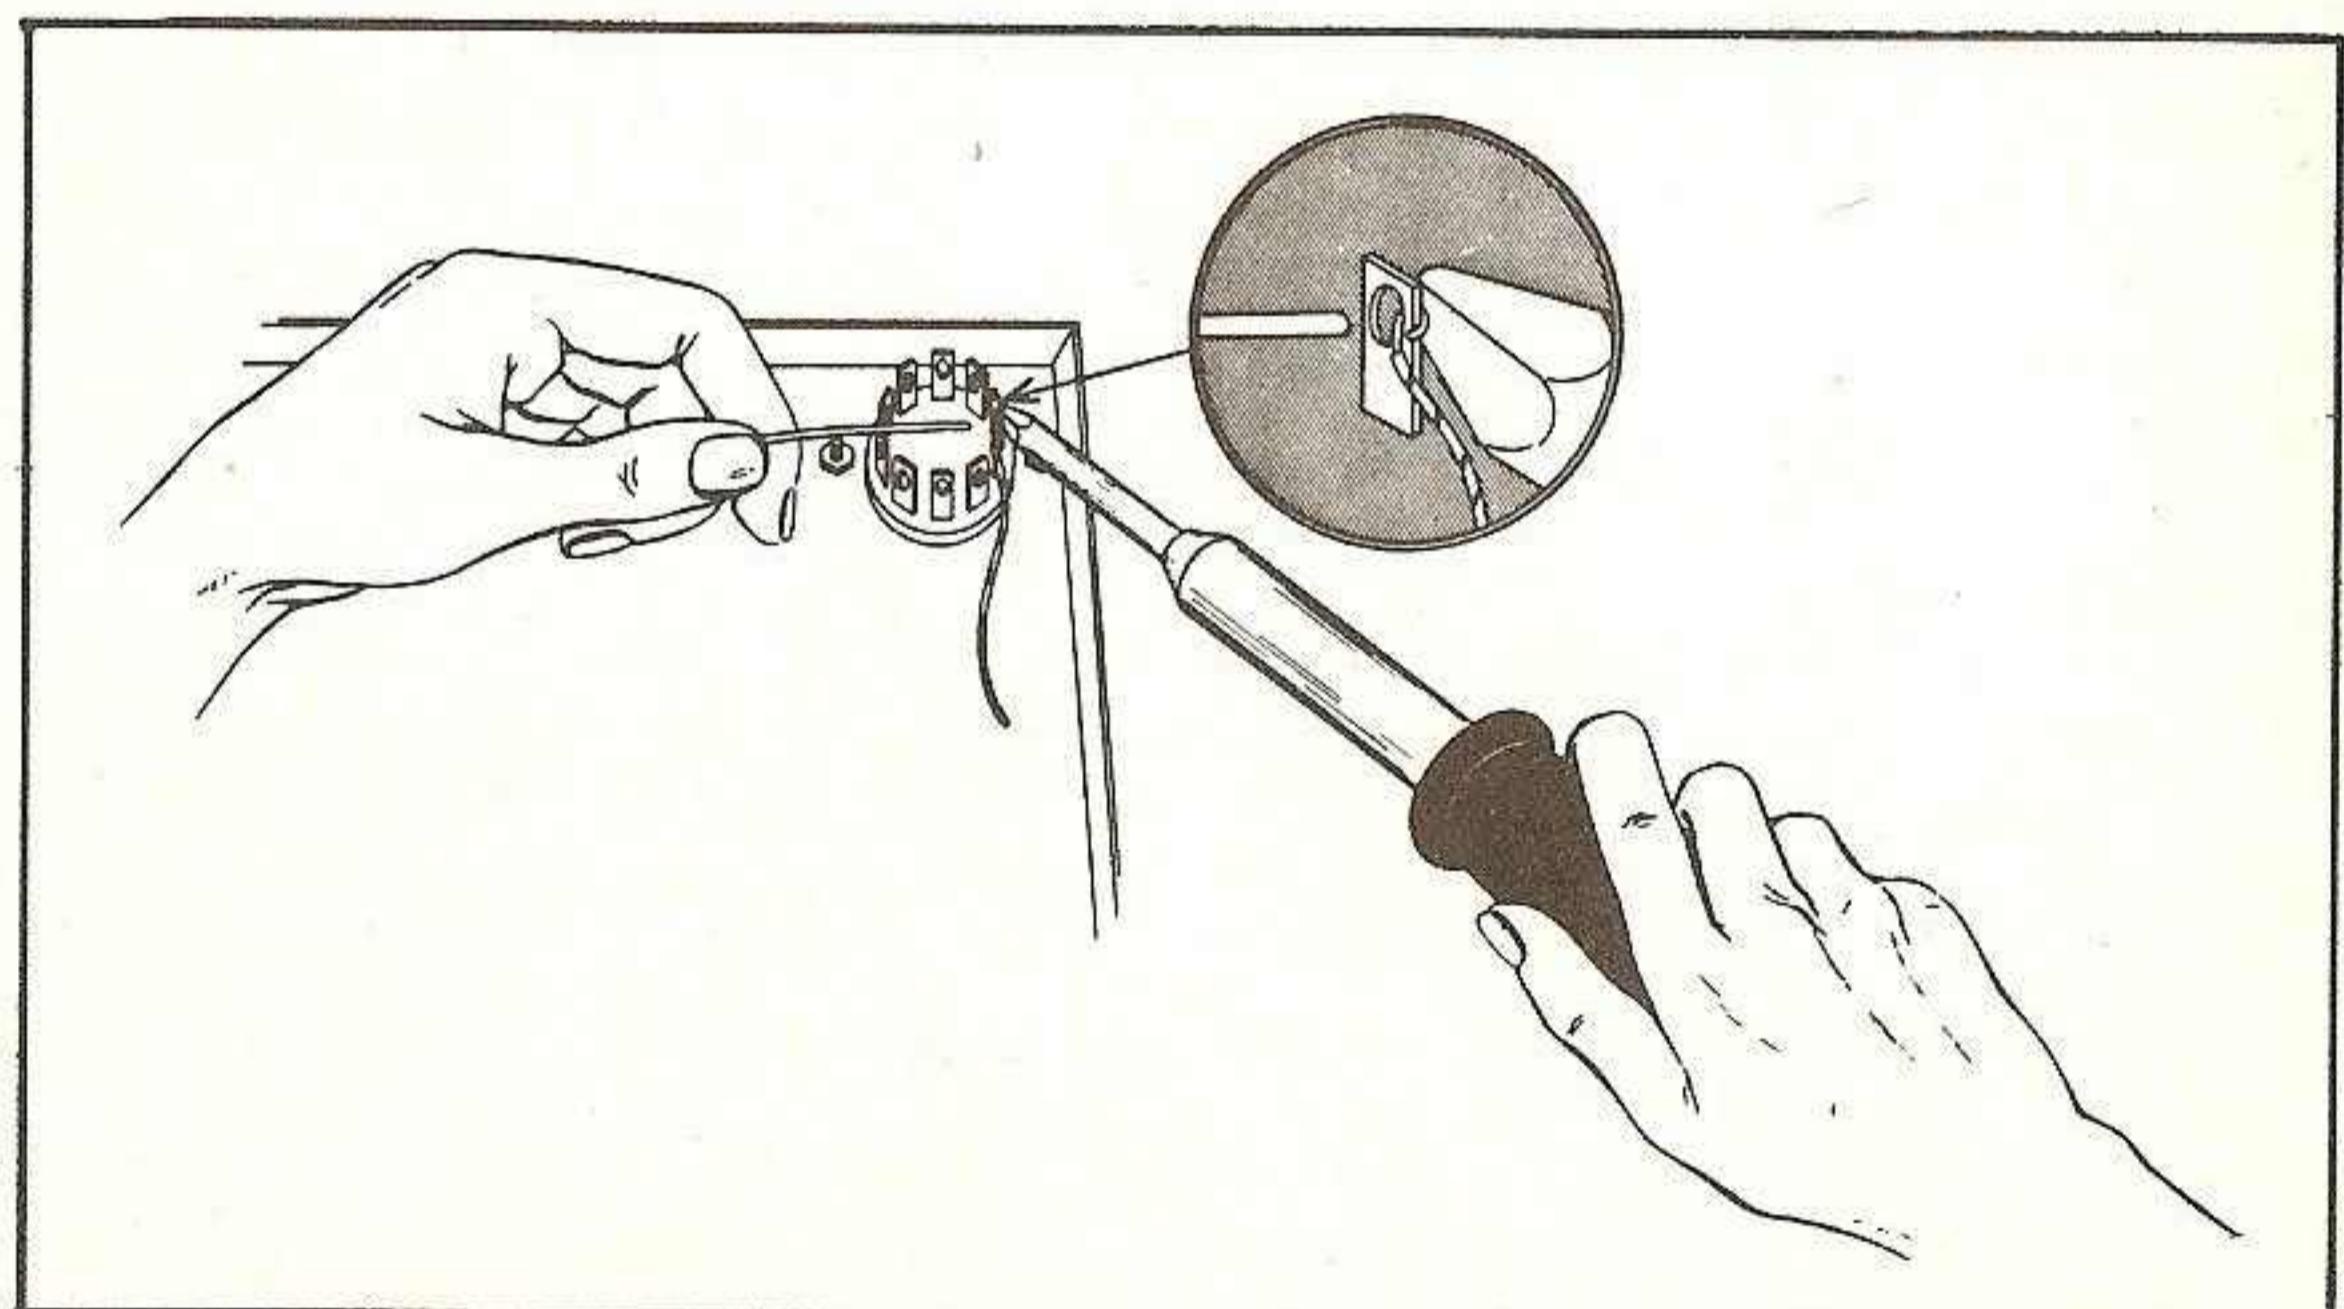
Proper soldering technique is necessary for construction of equipment.
